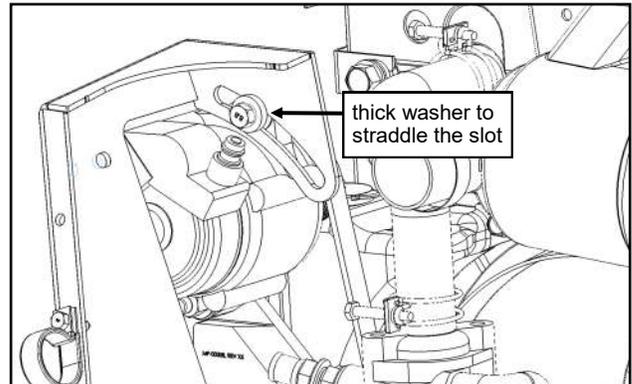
(Upper Aux. Alternator Bracket Hardware)
